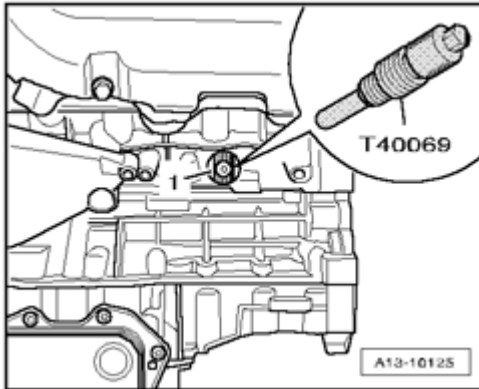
Installing Crankshaft Holder T40069 Into Hole
